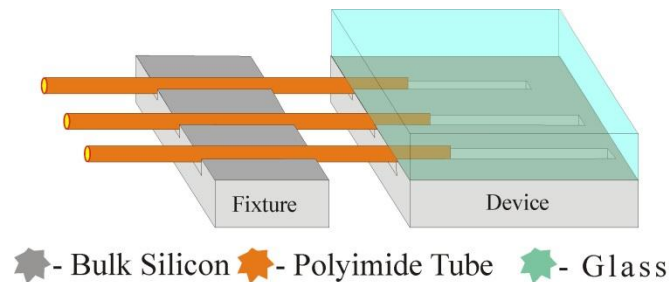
Drawing of alignment fixture used to aid insertion.
